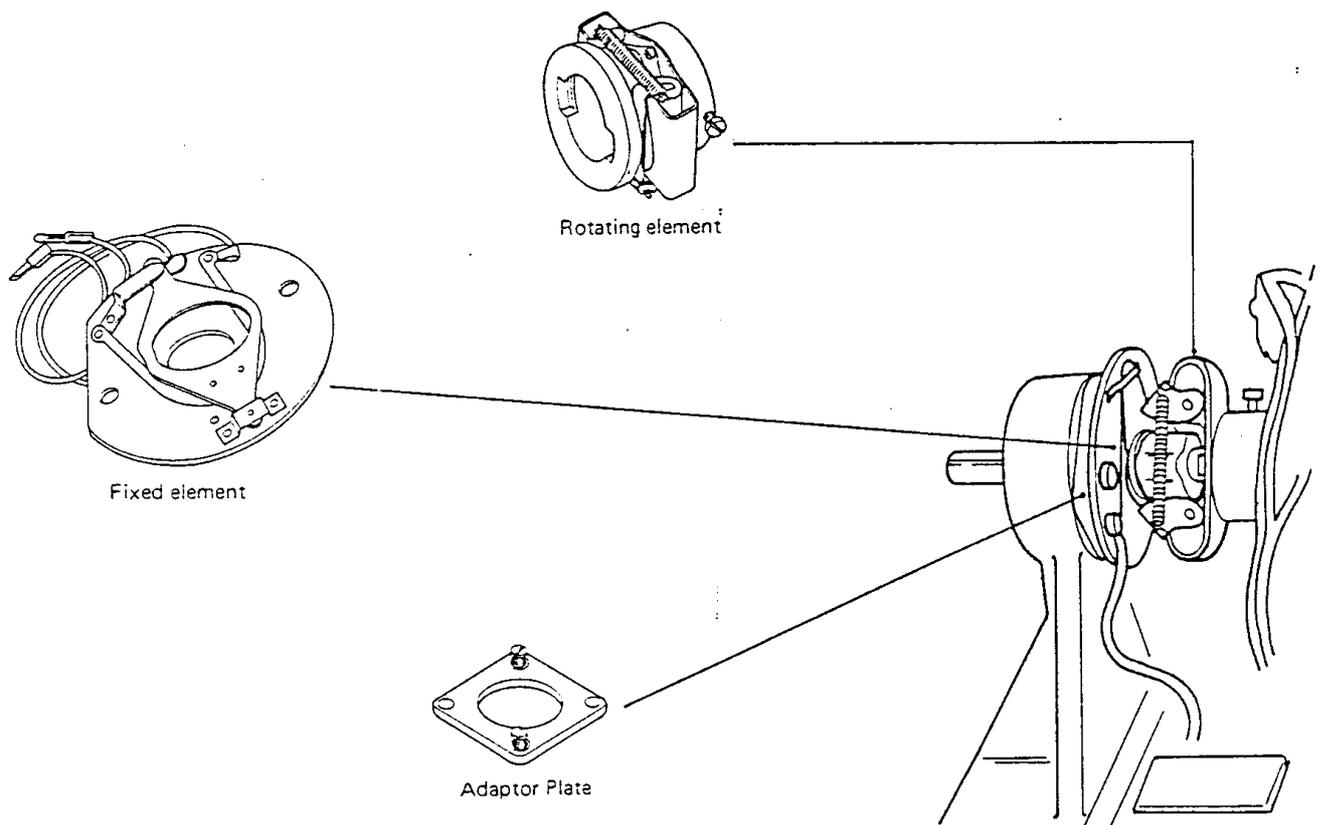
Assembling Centrifugal Switch to Bearing Housing
